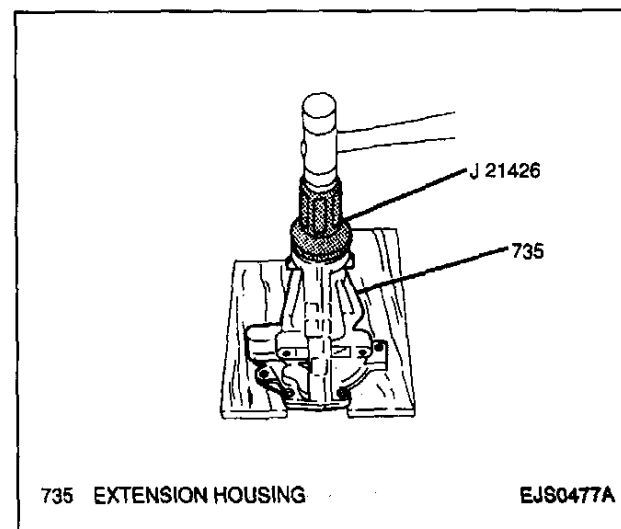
Installing Extension Housing Seal (3L30, 3-Speed)
